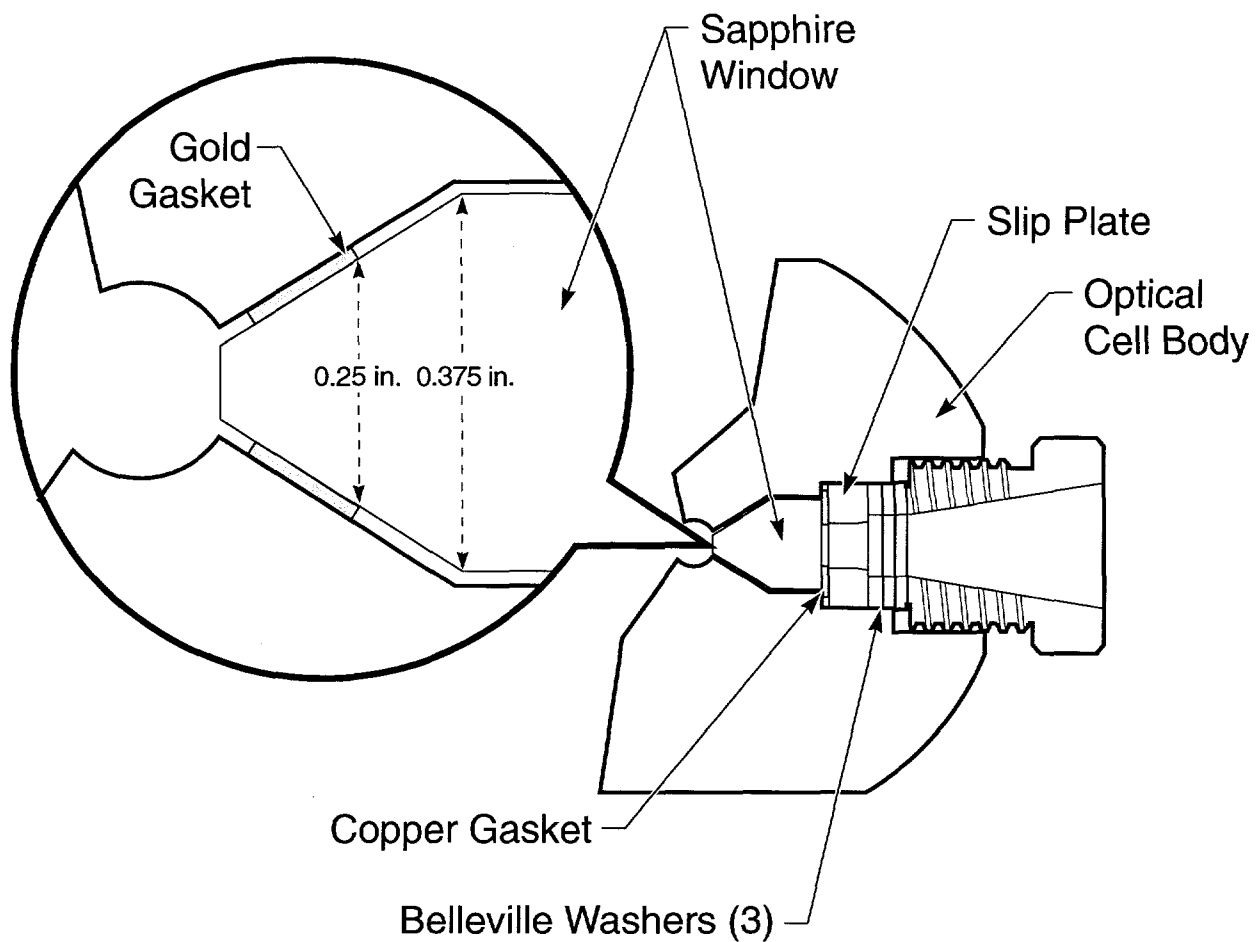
Detail of the flow optical cell window seal and Belleville washer spring assembly.
